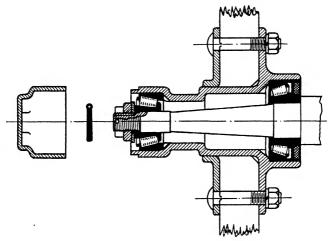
TIMKEN OPPOSED CONICAL ROLLER BEARINGS
